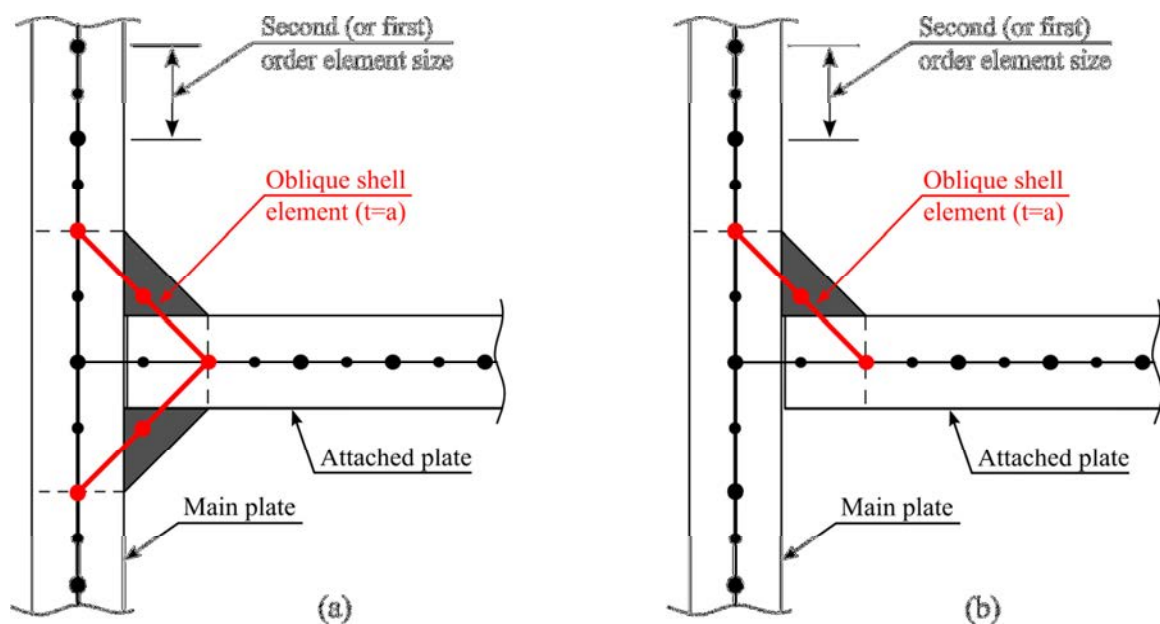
Weld modelling using oblique shell elements; a) two-side fillet weld, b) one-sided fillet weld
